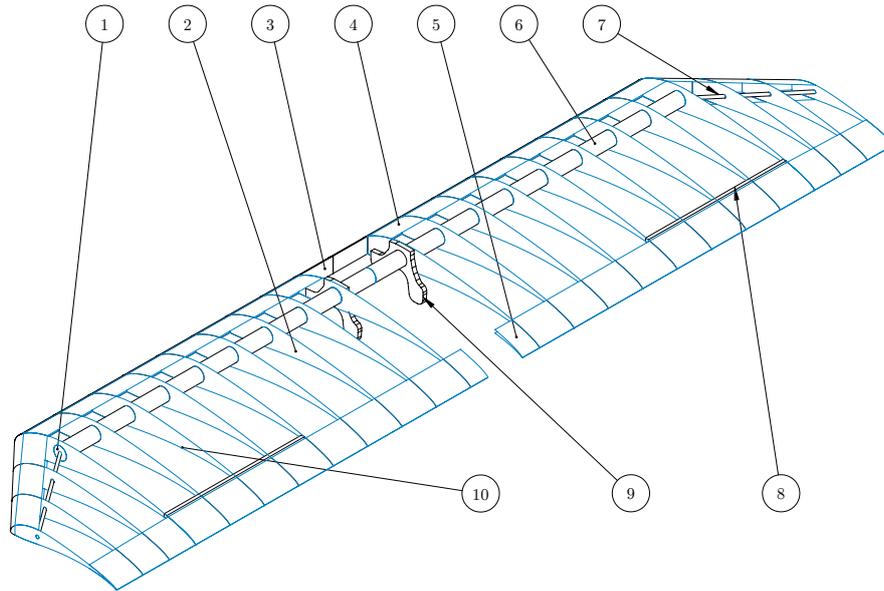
Structural layout and wing detailing designed by Draco Volans Aerodesign team
